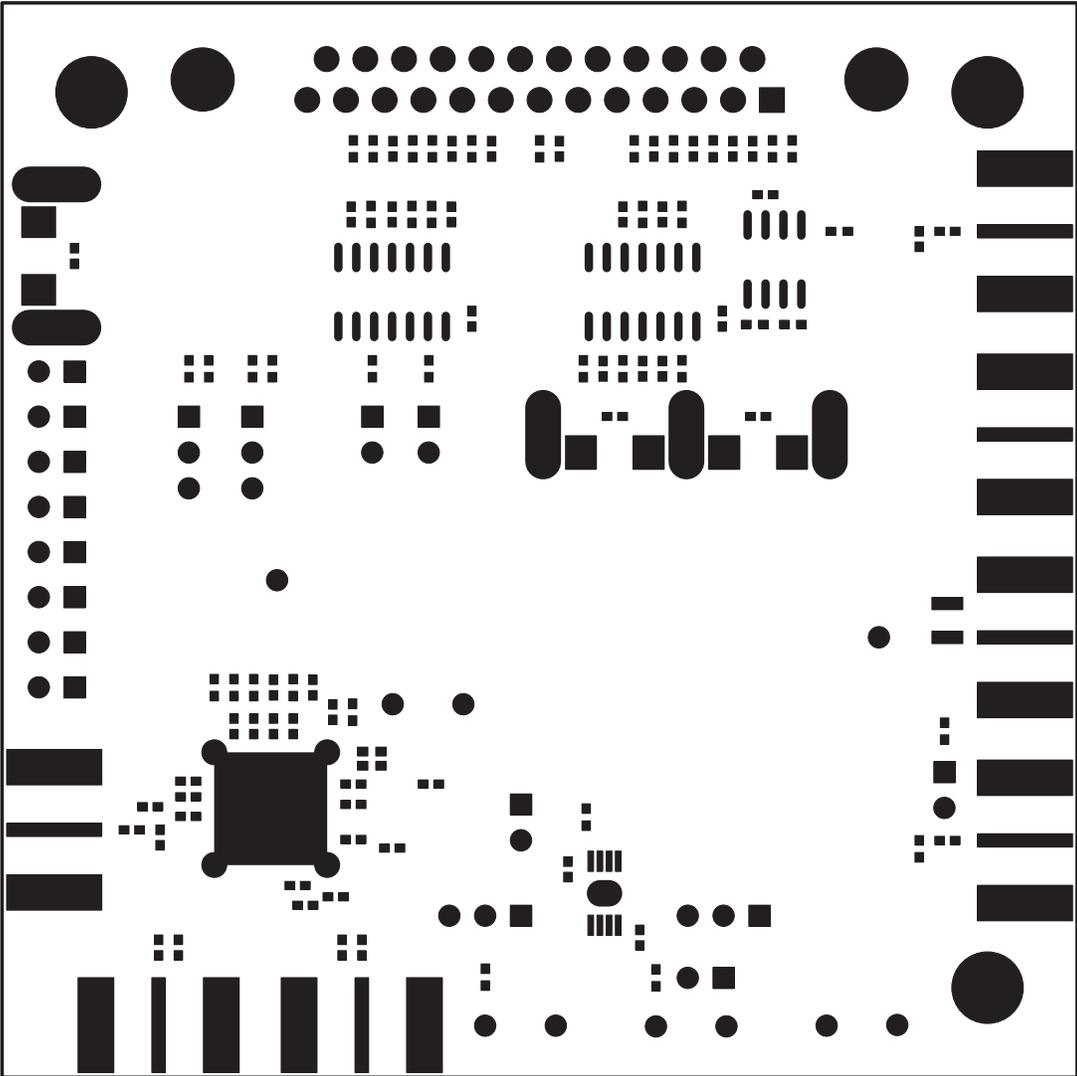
MAX2163 TQFN EV Kit PCB Layout—Top Soldermask
